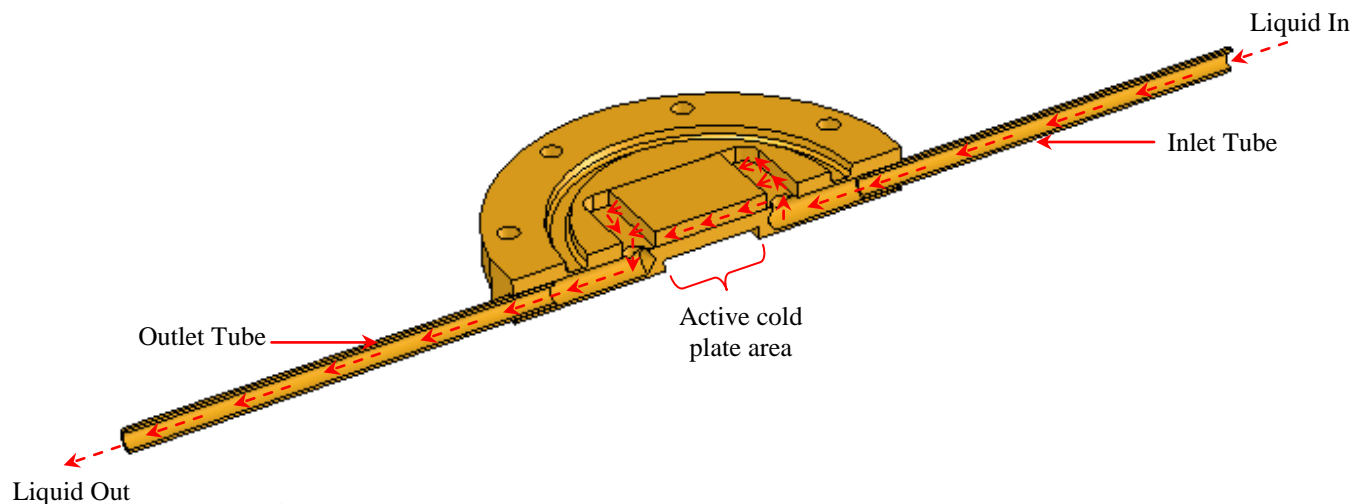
Cross Sectional view of the sintered porous heat sink showing the liquid flow pattern inside the cooling section
